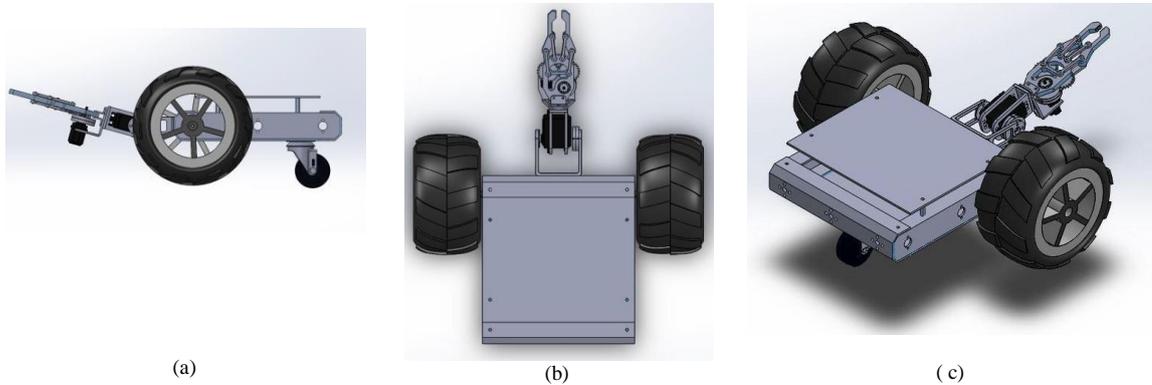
CAD design of the robot: (a) Side view, (b) Top view, (c) Isometric view
